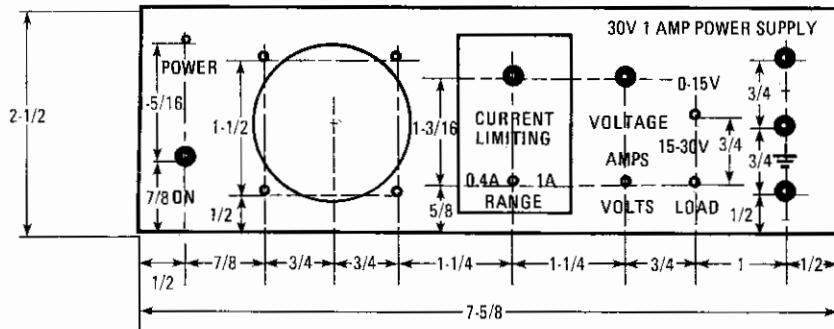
DRILL THE FRONT PANEL OF THE POWER SUPPLY according to the dimensions shown here.
